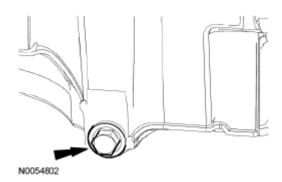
Locating Drain Plug Courtesy of FORD MOTOR CO.
